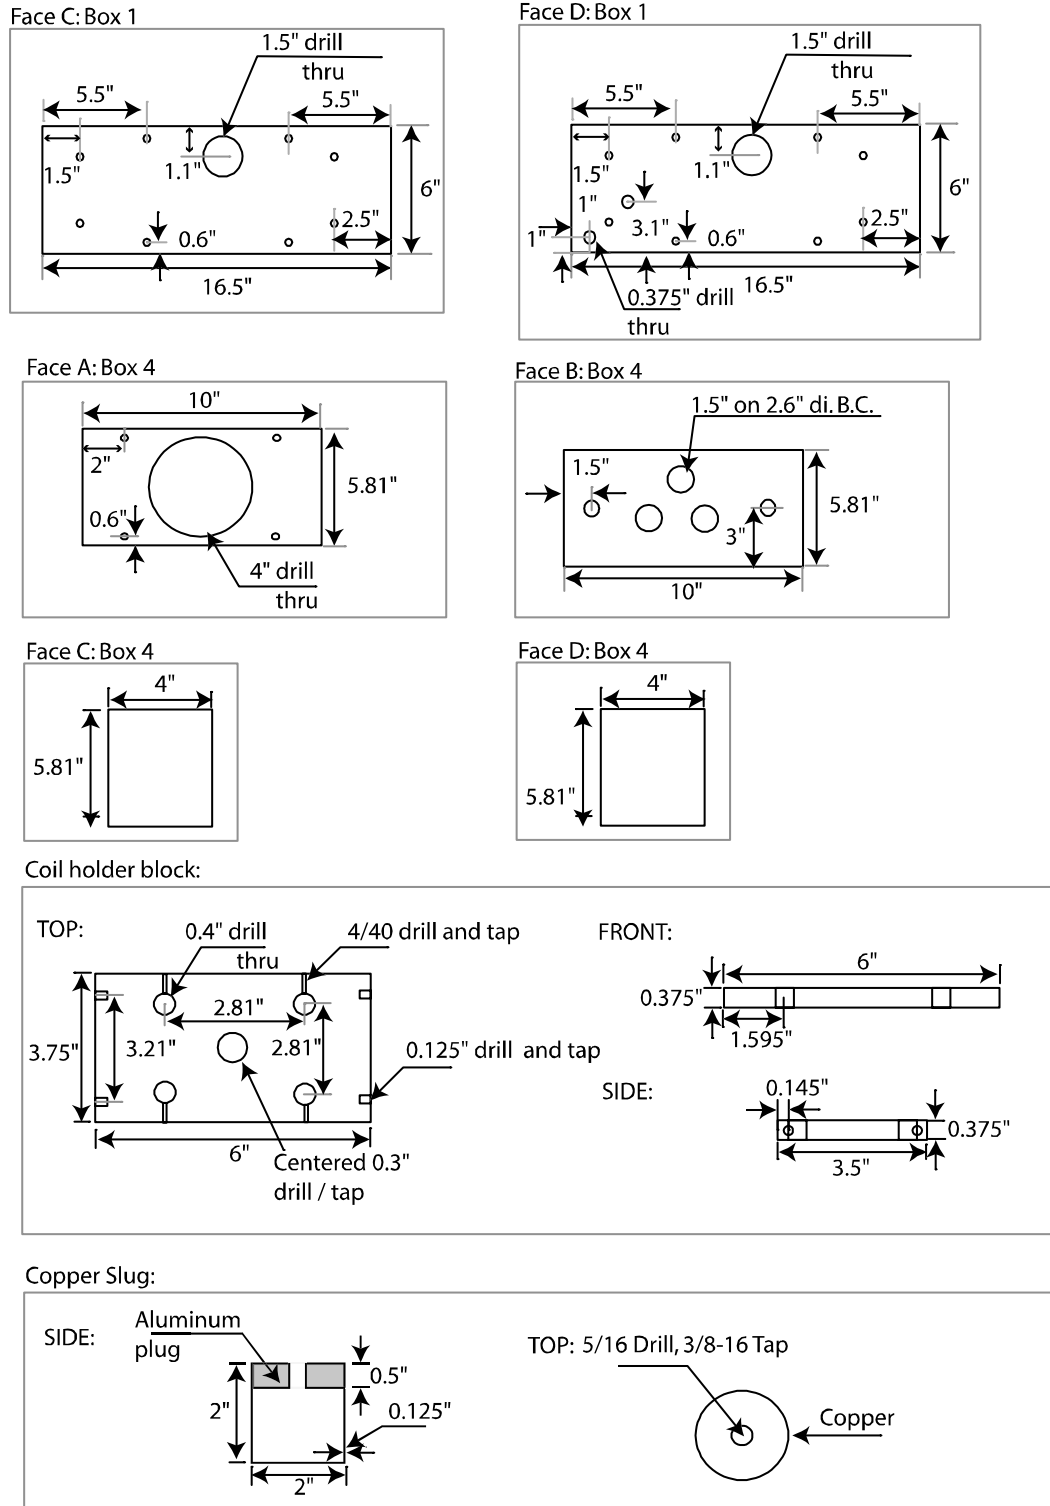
Mechanical drawings of rf enclosures (continued), Coil holder block, and Copper slug described in Section 2.4.
